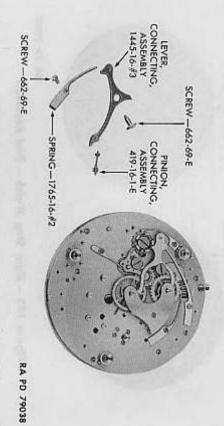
Elgin Stop Watch — Connecting Lever Assembly Removed
